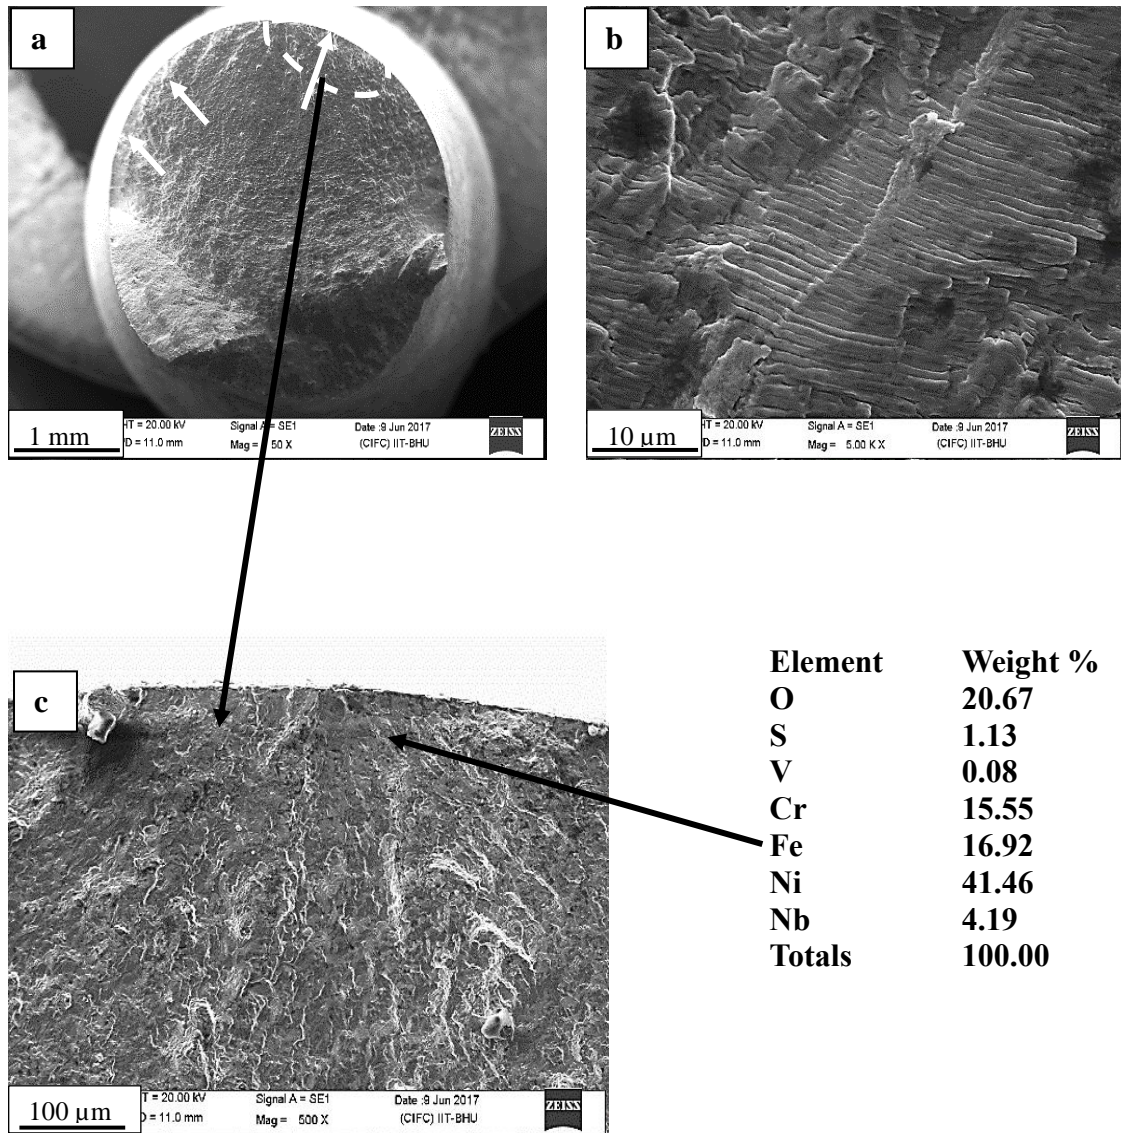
10: Fractographs of the fatigue sample pre-corroded and fractured from HCF at the stress amplitude of ± 650 MPa at 600°C in air showing: (a) fracture surface and crack initiation sites, (b) fatigue striations, and (c) EDS analysis close to the crack initiation site.
